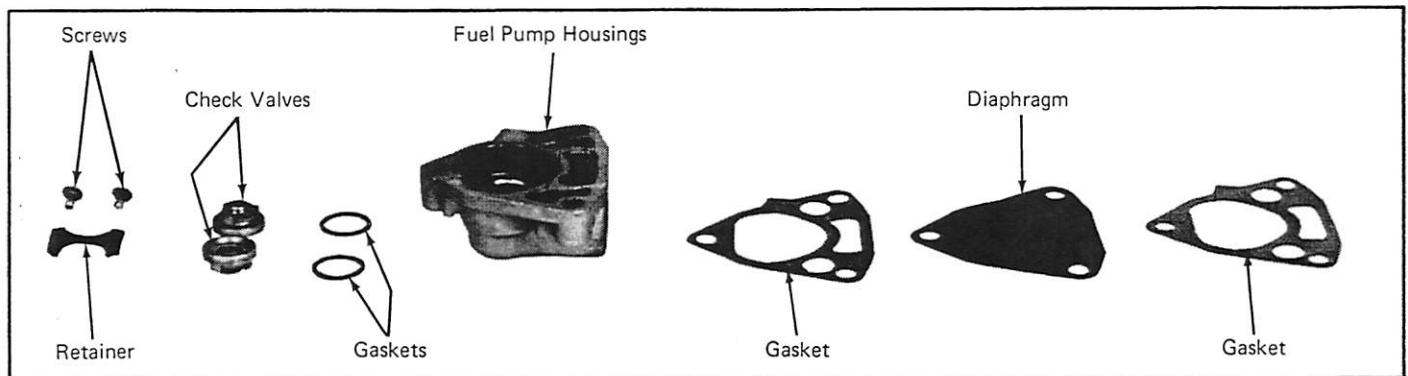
Fuel Pump A-55156A5 Type, Exploded View
